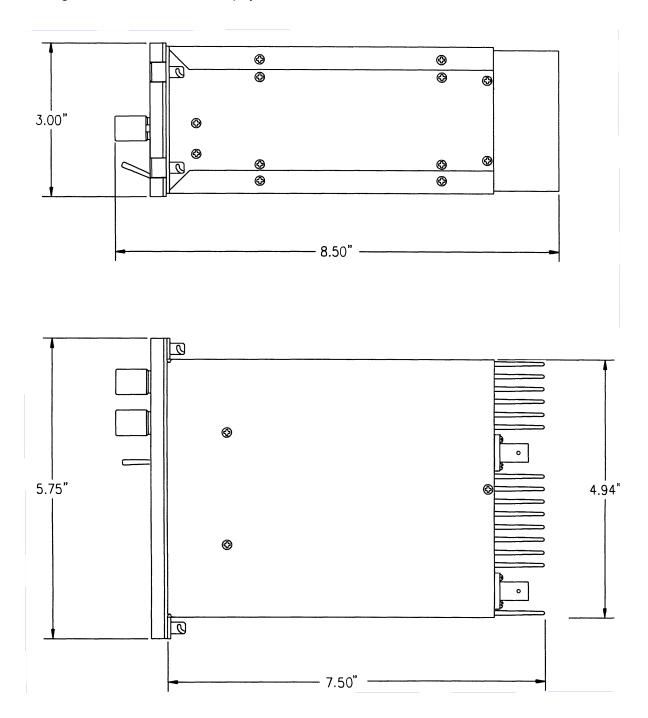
Outline Drawing for TDFM-136B Transceiver
